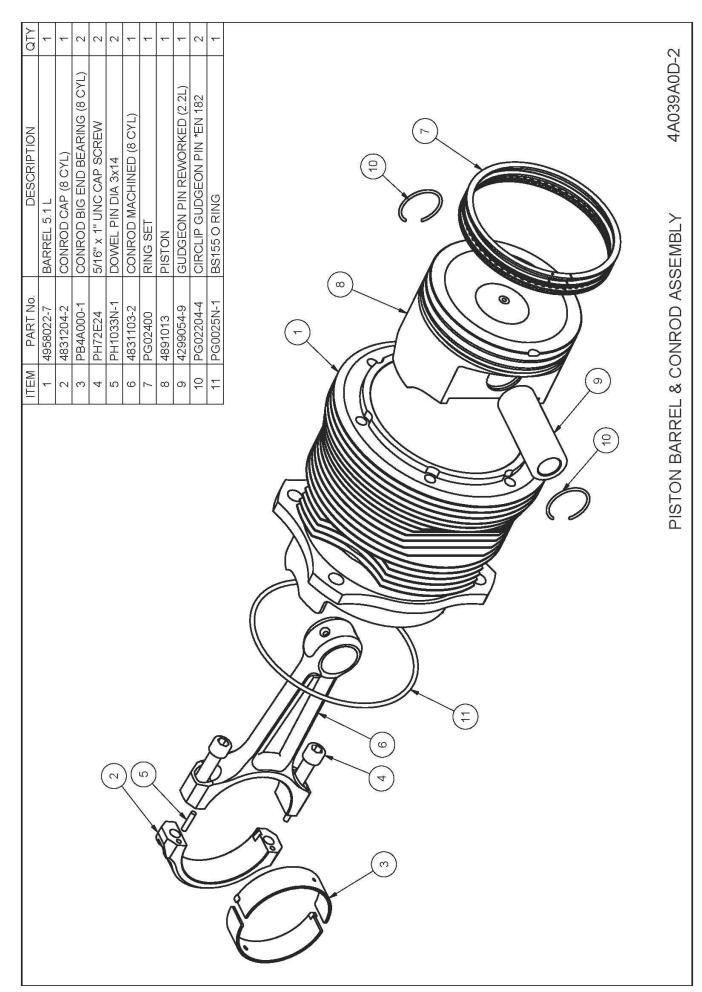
Piston, Rod, Barrel & Ring Assembly
